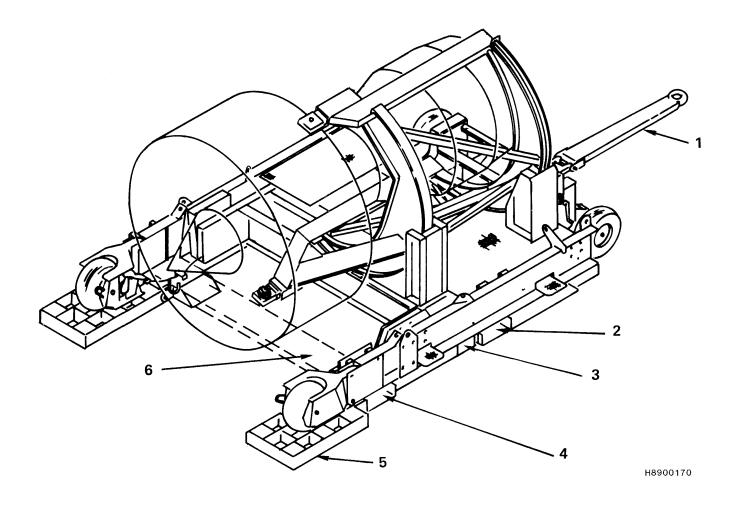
Multi-Purpose Trailer - F-108 Engine
